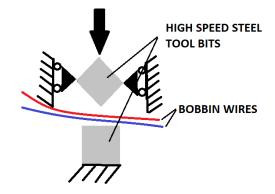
Tool bits arranged to pinch through wire insulation and probe bobbin wires for resistance measurement [17].
